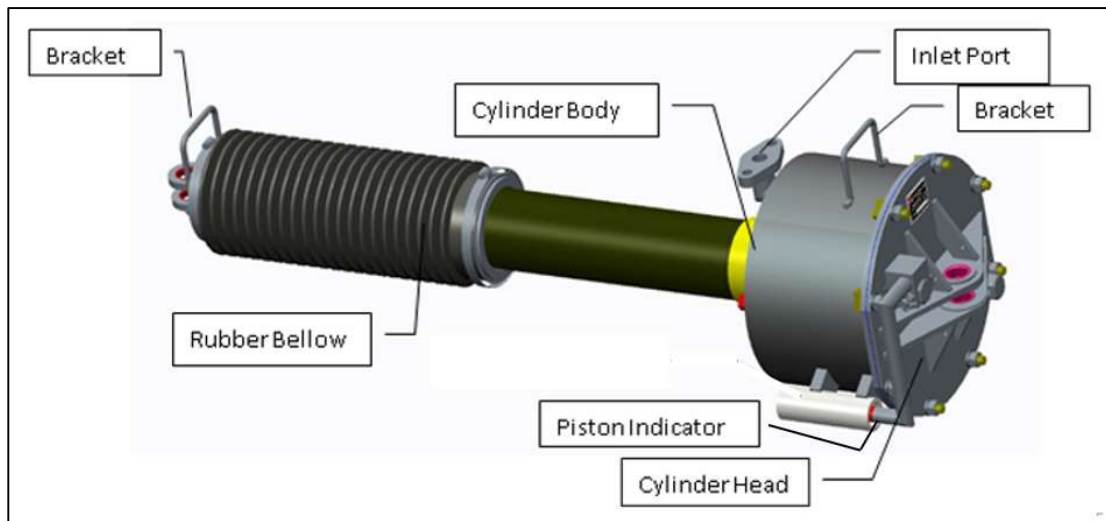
Brake Cylinder – 11 Inch without hand brake arrangement (Drg. No.3EB7347 Alt. Latest)
